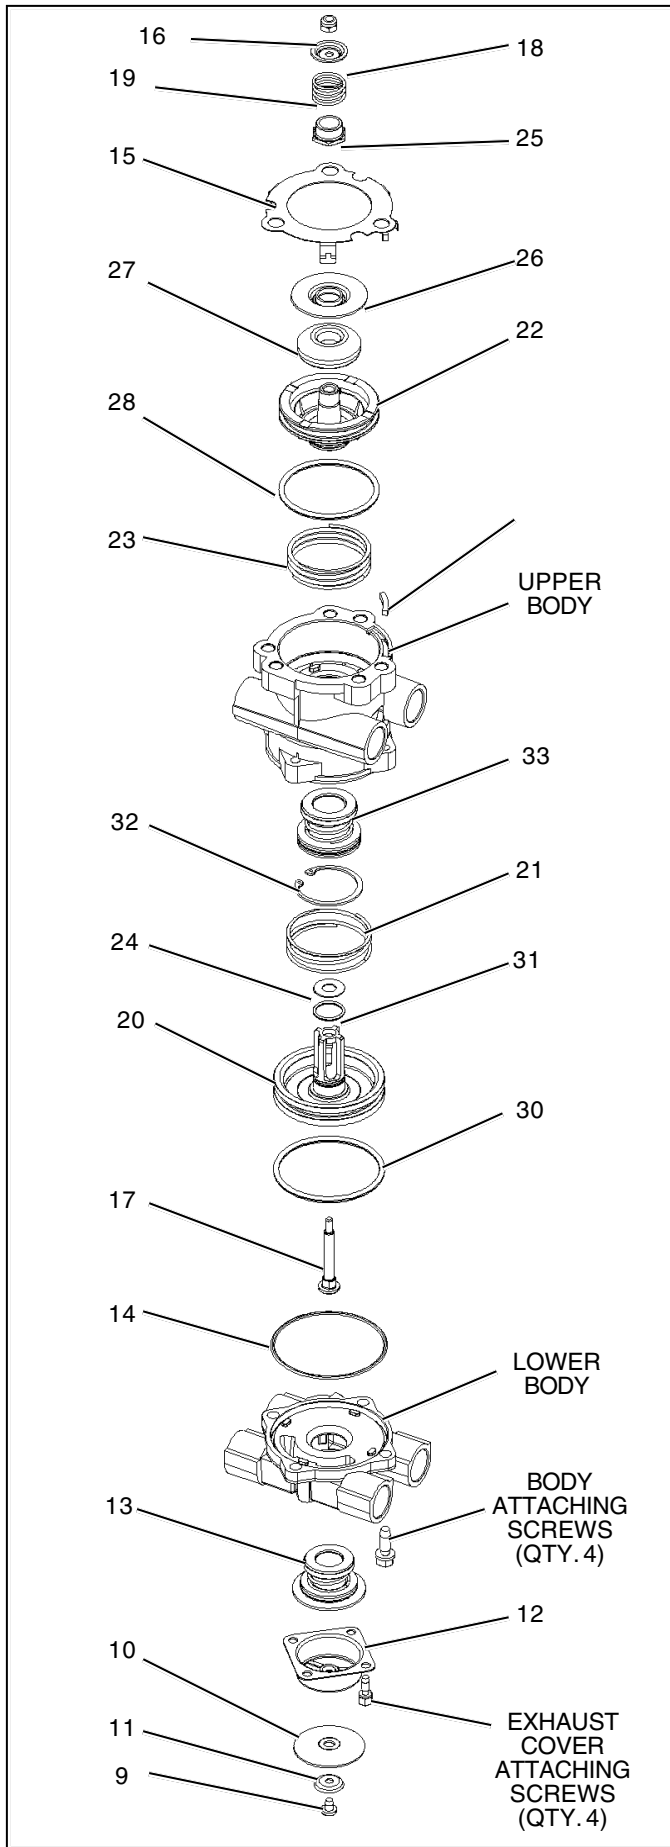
E-8P BRAKE VALVE - EXPLODED VIEW
